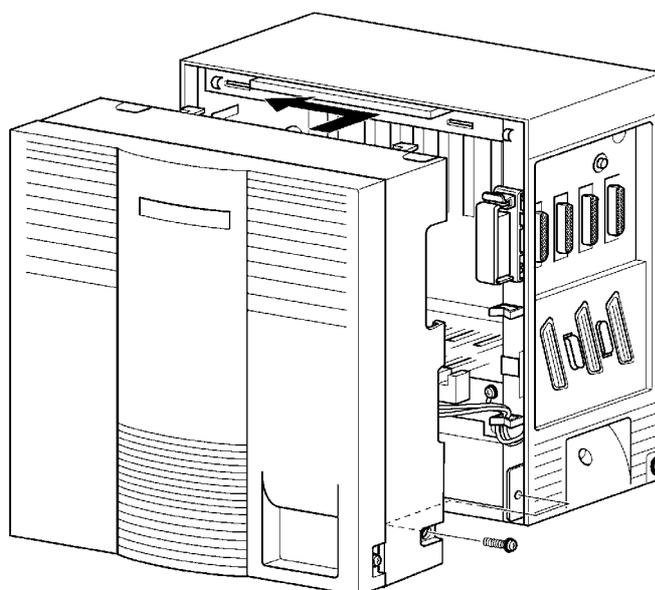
Attaching the Front Cover and the Front Cover Extender to the KSU
